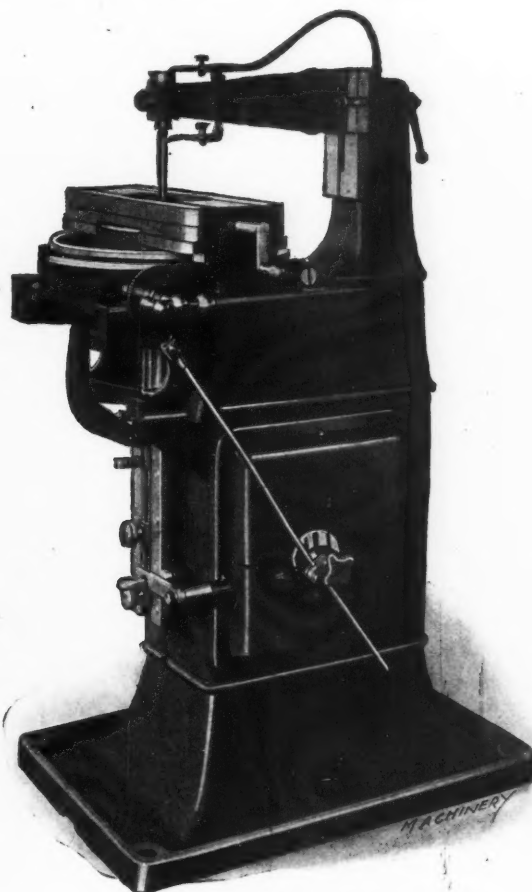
Side View of Machine, showing Arrangement of Universal Table and Tool
